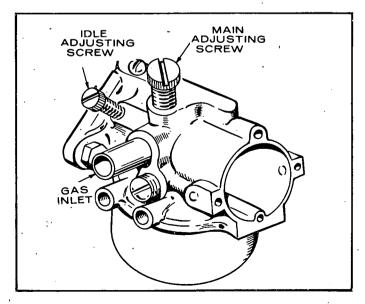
GAS CARBURETOR ADJUSTMENT
